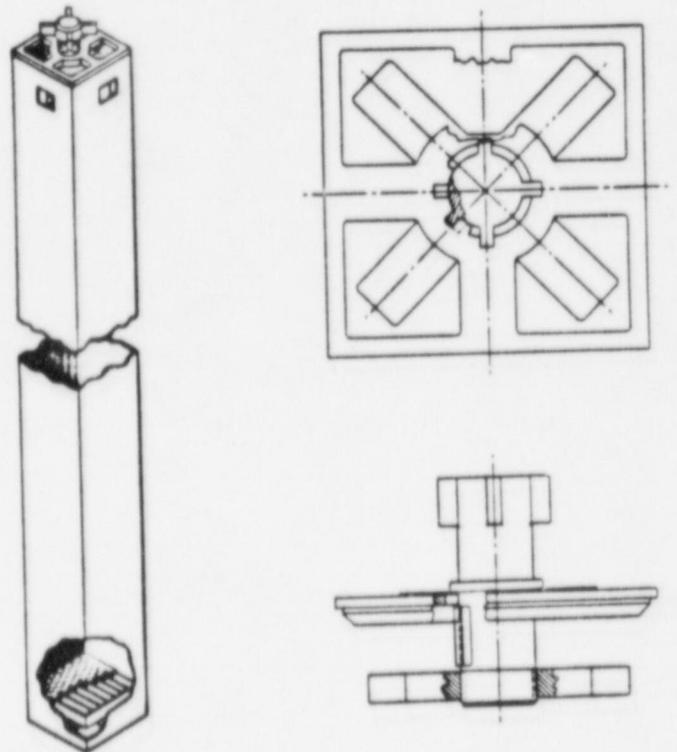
Consolidated Fuel Storage Box and Cover Assembly.
